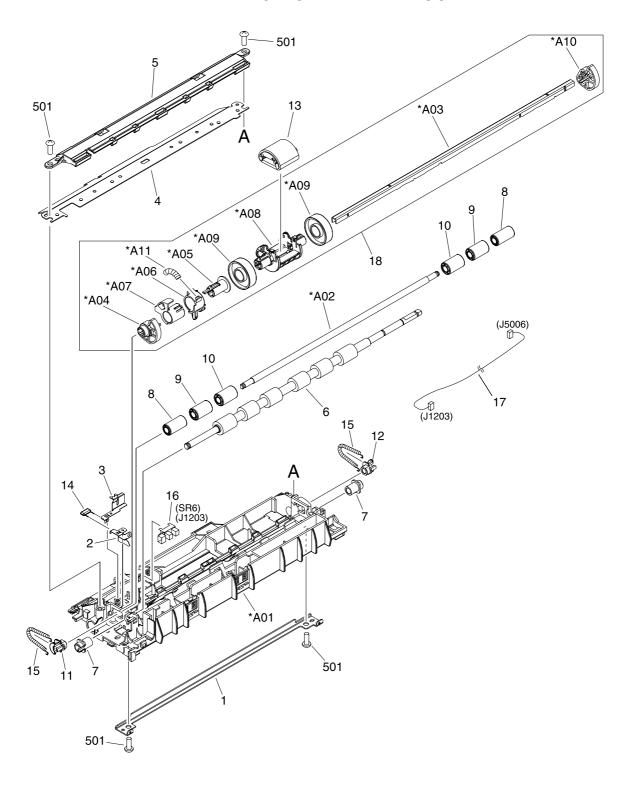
Paper pickup feeder assembly (Tray 3)
